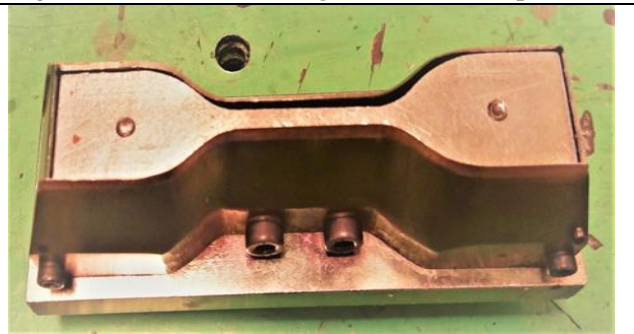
Cutting mold for dumbbell and tear, Type-C specimen respectively
